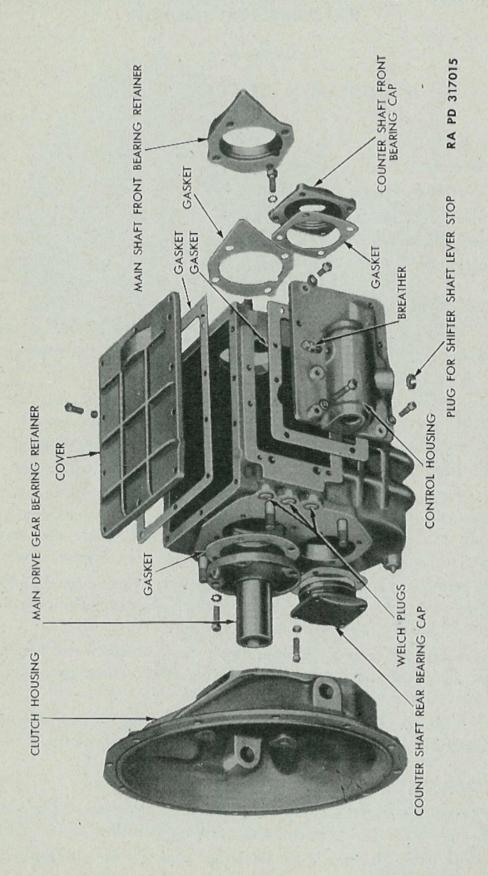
Transmission Case, Covers and Gaskets, Disassembled
